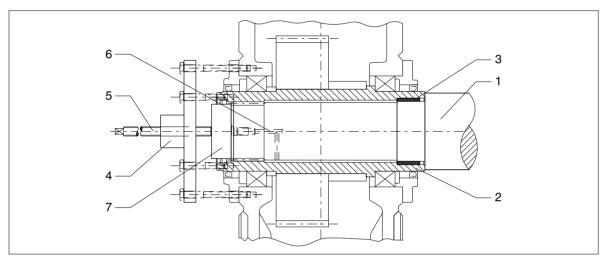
Hollow shaft with internal spline, demounting with hydraulic lifting equipment ("Lukas")
